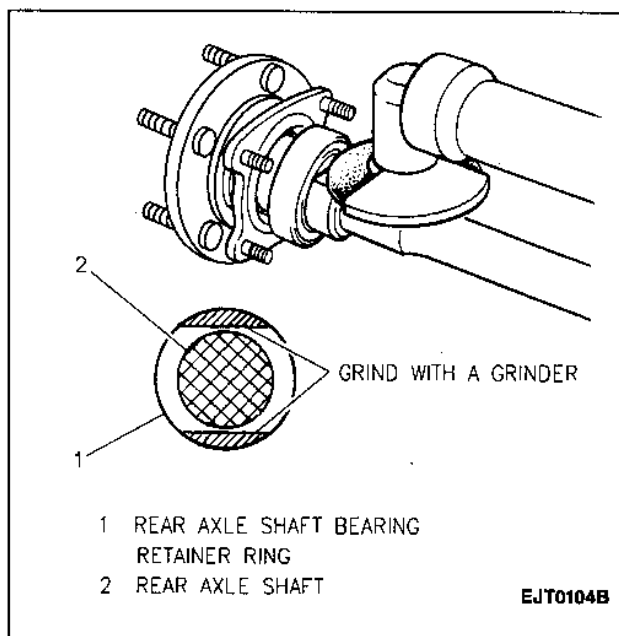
Grinding Rear Axle Shaft Bearing Retainer Ring
